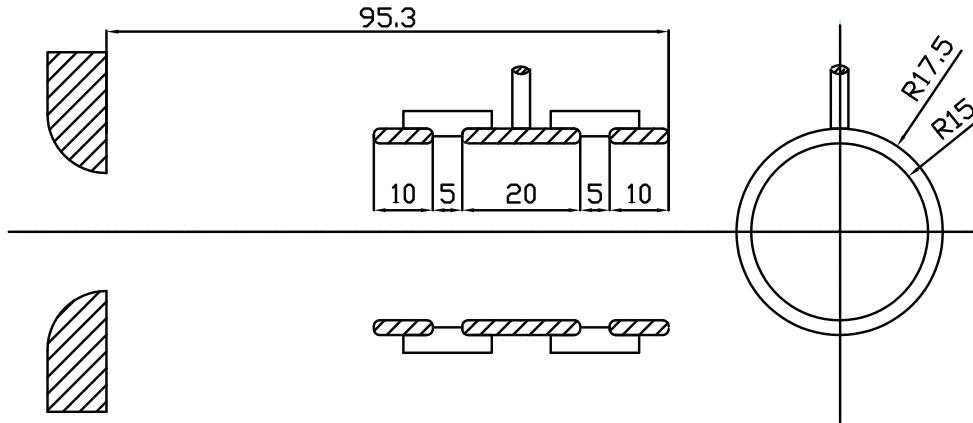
Technical drawing of the Einzel lens used in this experiment. Left is a side view of the Einzel lens together with the exit hole of the accelerator. Right is a front view of the lens. All dimensions are in mm.
